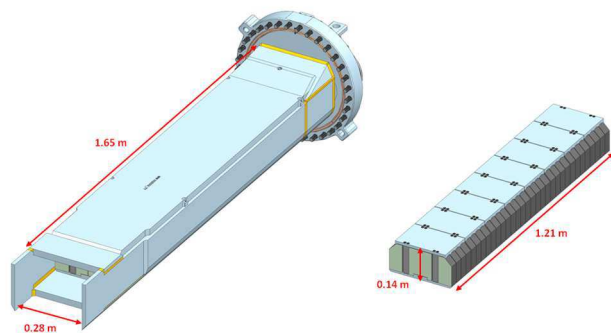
Figure VI. Layout and sizing of a fully-shielded midplane port plug for SPARC. Diagnostic systems are integrated by making subtractive modifications to the baseline design by removing shielding blocks and creating tapped holes and voids for mounting components and creating lines of sight.
